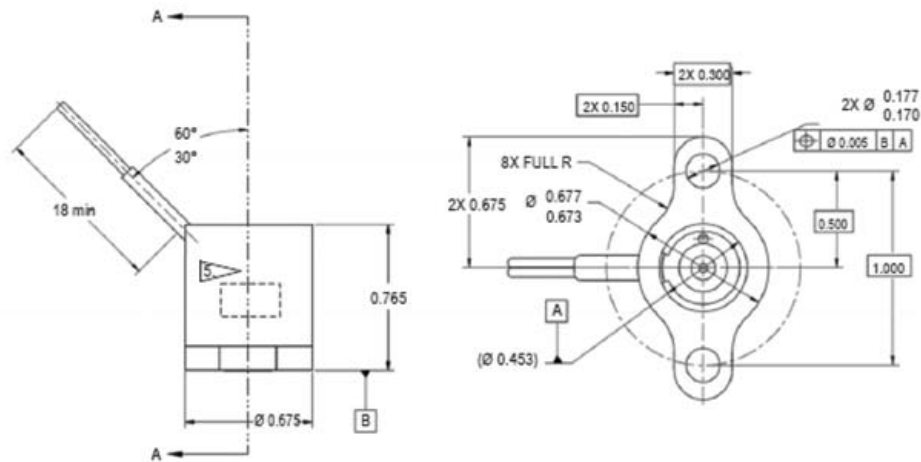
Drawings of the long-lifetime solenoid-actuated pulsed gas valve showing (left) a profile view of the overall valve and (right) a view from the bottom.
